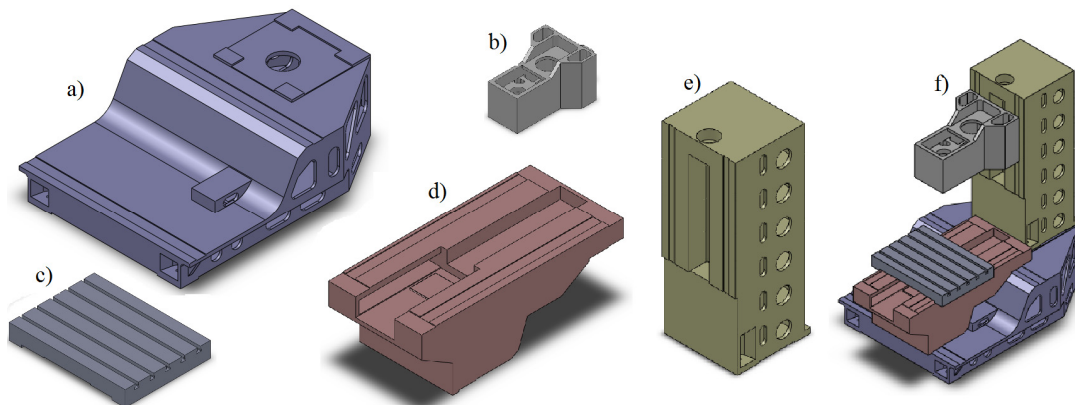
Milling machine cast body elements used in simulative analyses: a) bed, b) headstock, c) axis Y table, d) axis X table, e) stand, f) assembled components.
